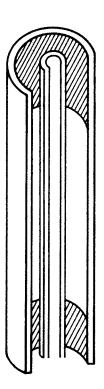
The double rod section of the equipment for core drilling by reverse flushing.
